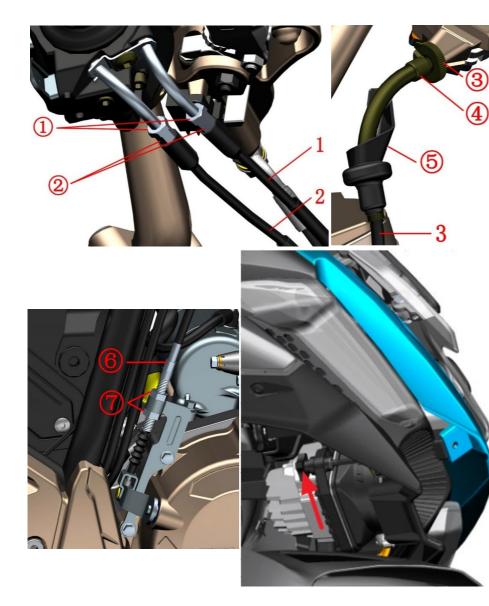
FRONT FORK		Throttle/clutch cable clearance adjustment, light height	CHK	Q
